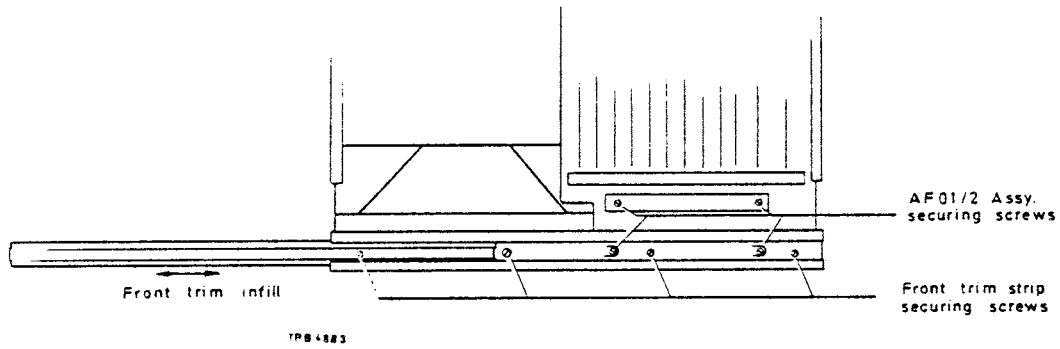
Front trim strip and AF01/2 assy. securing screws.
